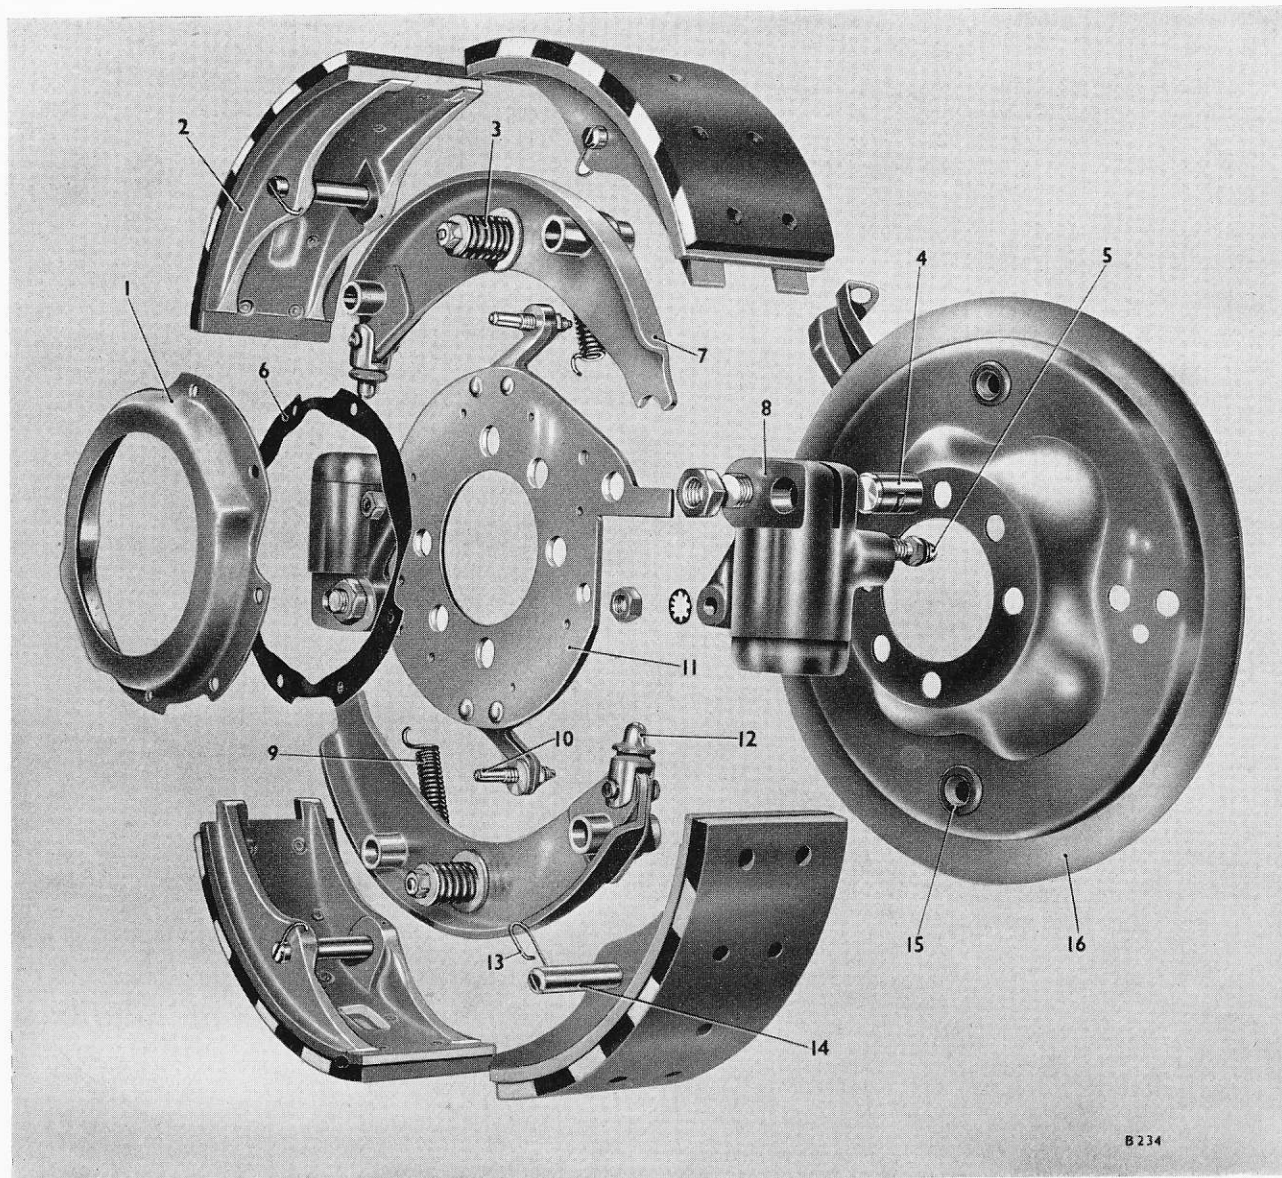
Exploded view — Bentley Continental S2 four shoe brake
